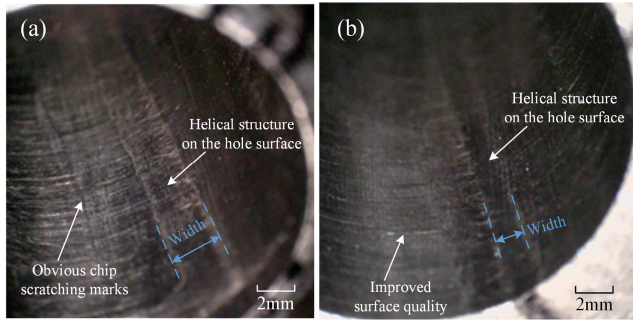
The helical structures on the hole surface in (a) CSLD and (b) LFBASLD at about 50mm drilling depth.
